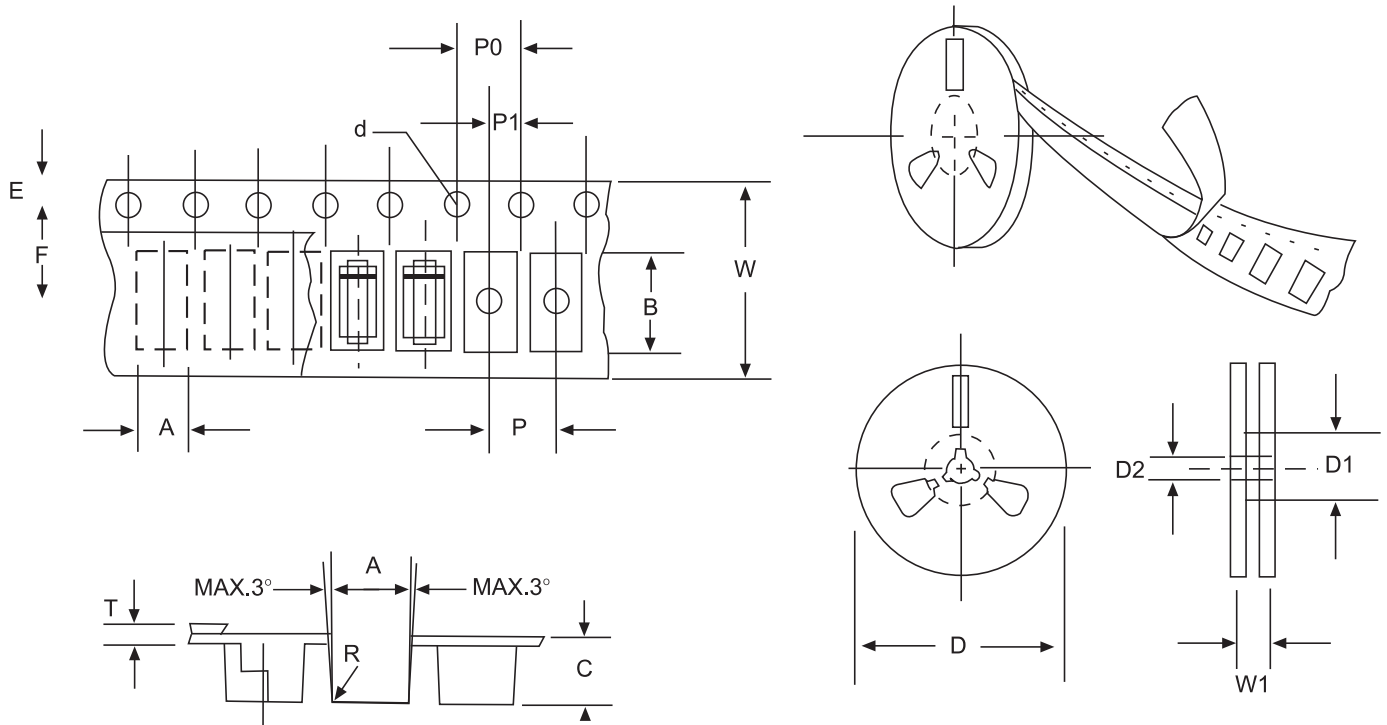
FIG: CONFIGURATION OF SURFACE MOUNTED DEVICES TAPING
